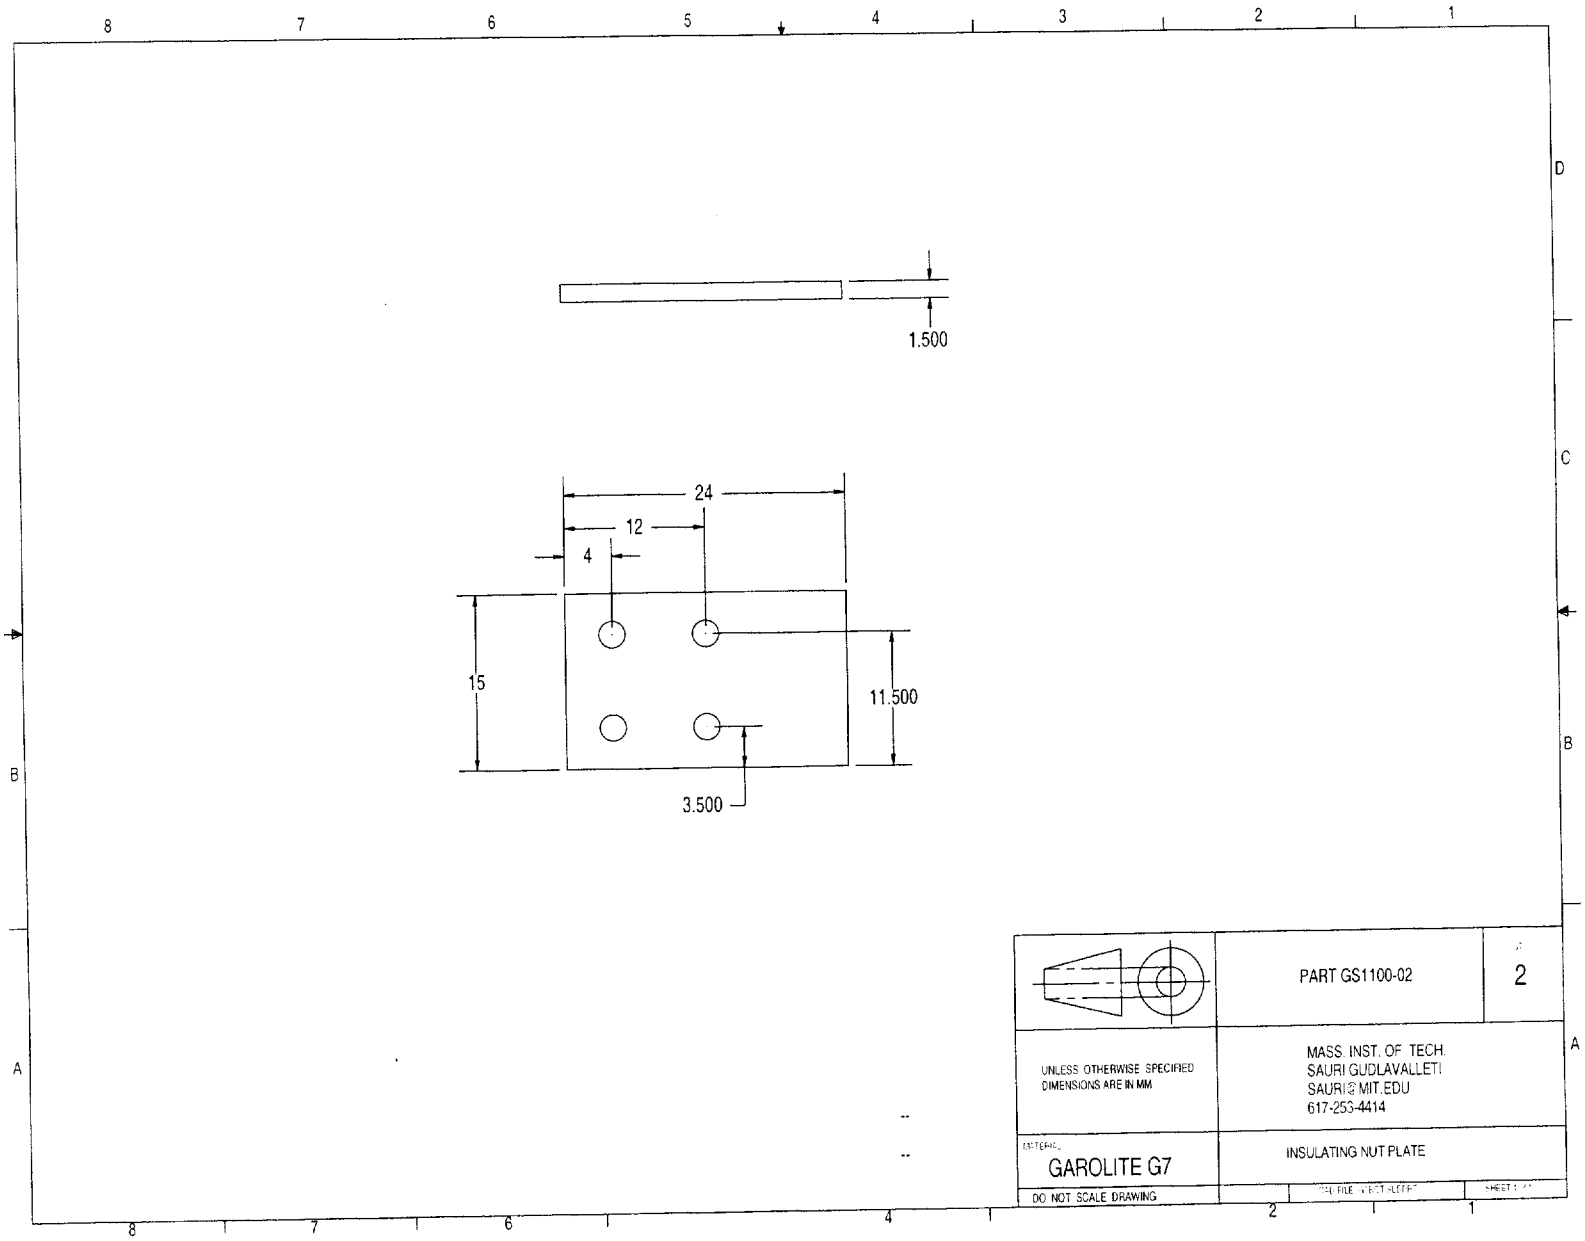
Part GS 1100-02. Insulating nut-plate for use with Part GS1100-03, 04 or other appropriately designed grips. Ref. Fig. 4-4 for an assembly drawing.
